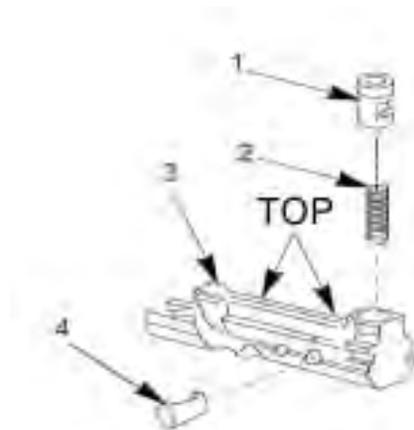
Slide Body , Roller Assembly, Spring, Pivot Slide.
